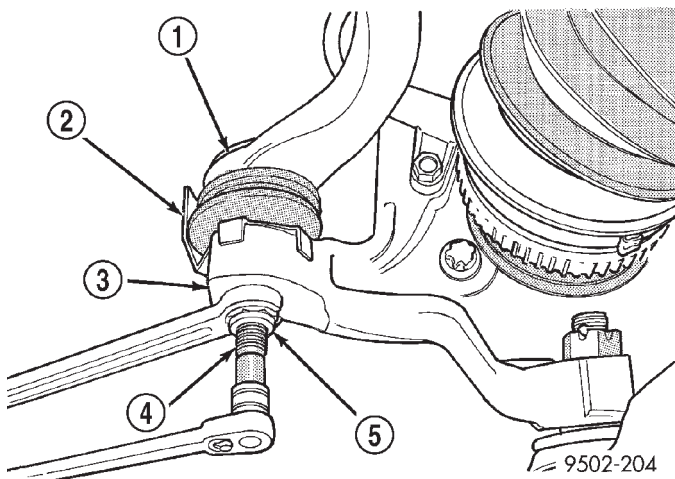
Tie Rod End Attaching Nut Removal/Installation
